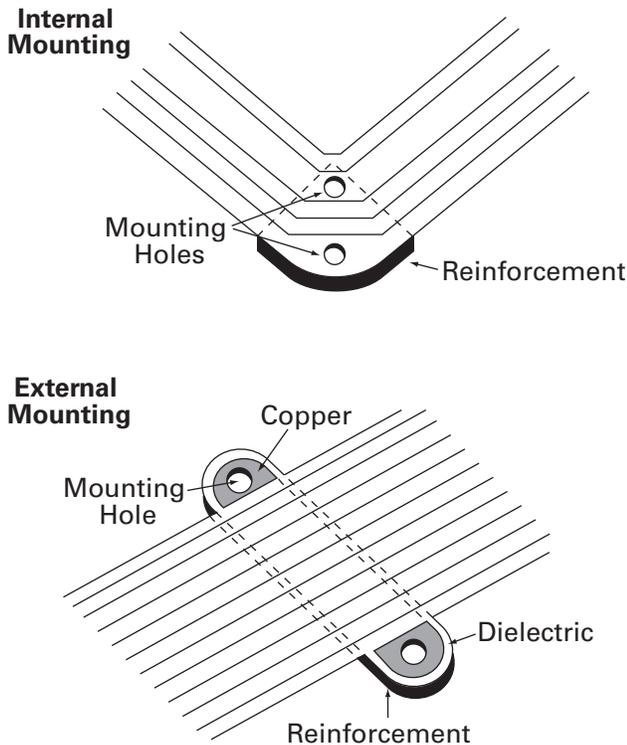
Mounting holes can be built in, internally or externally, to secure circuits.
